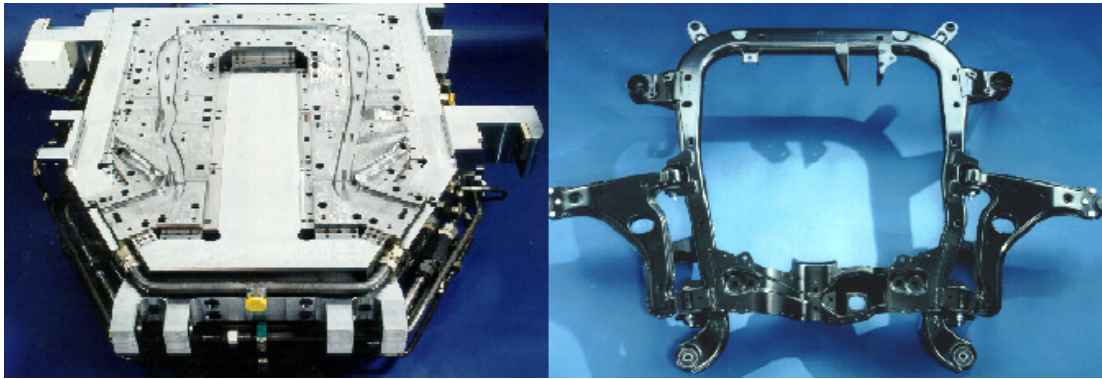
Tube Hydroforming tool and Engine support with mounted parts.[1]
